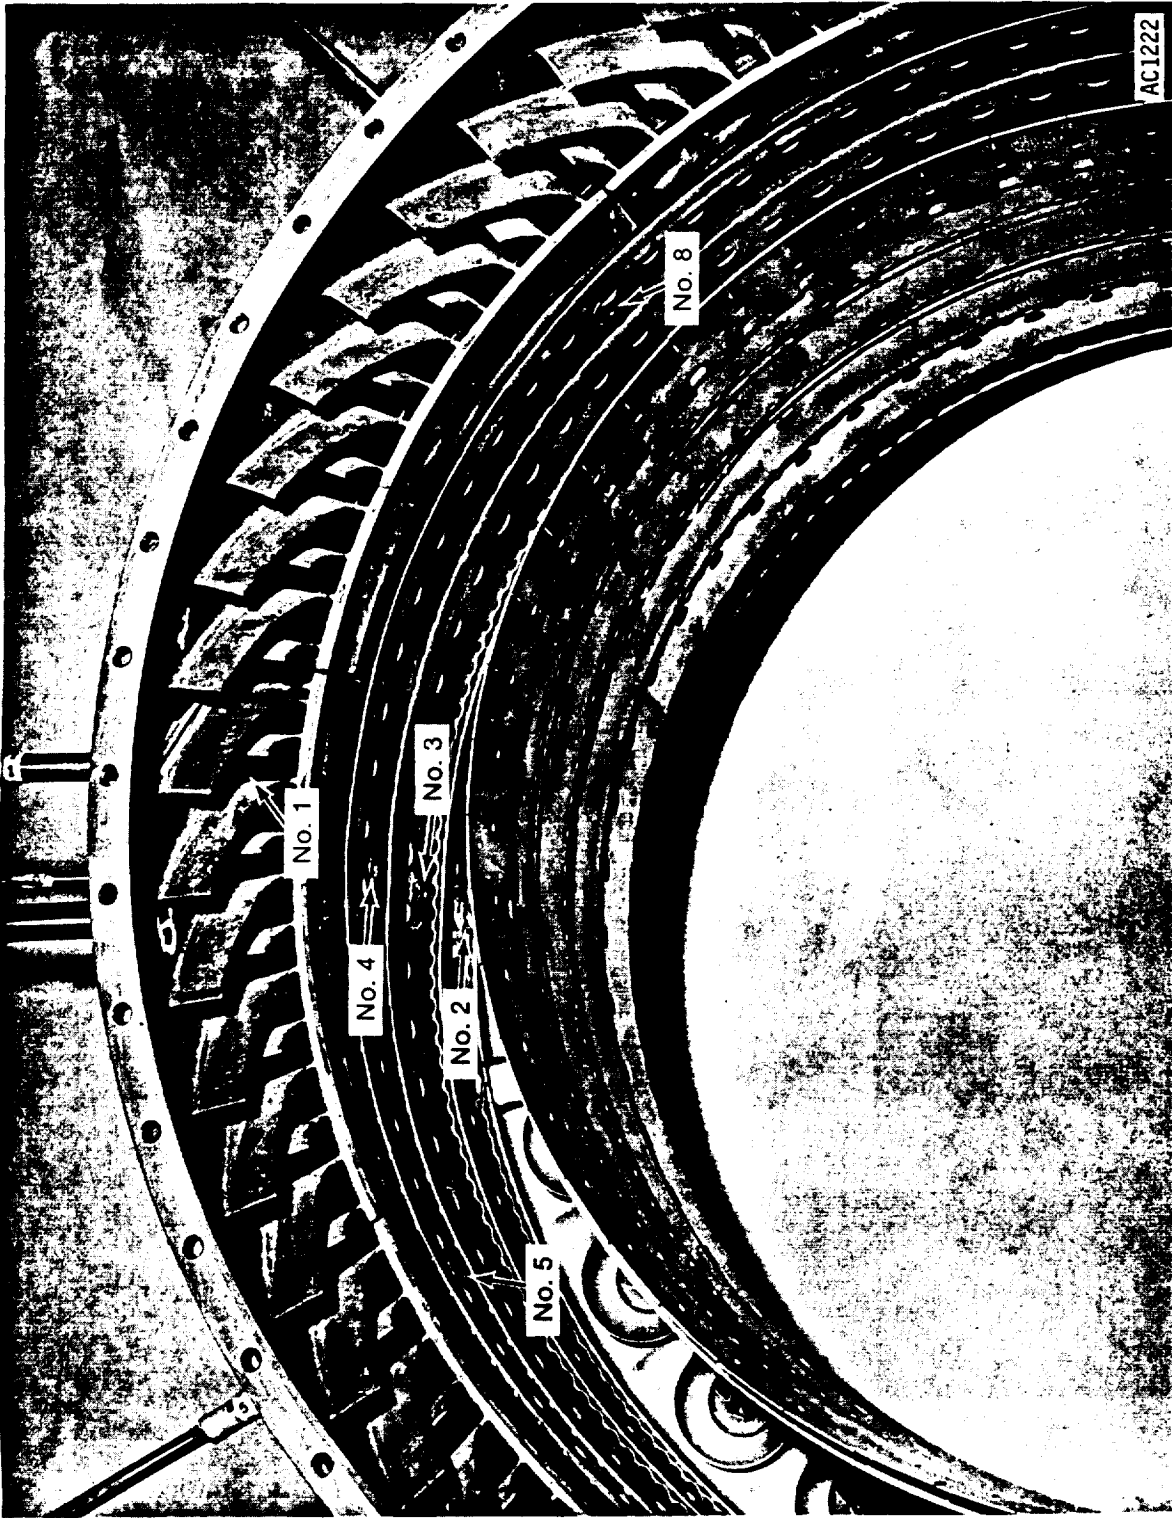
Acoustic Probe Tubes Mounted in YF102 Combustor •
